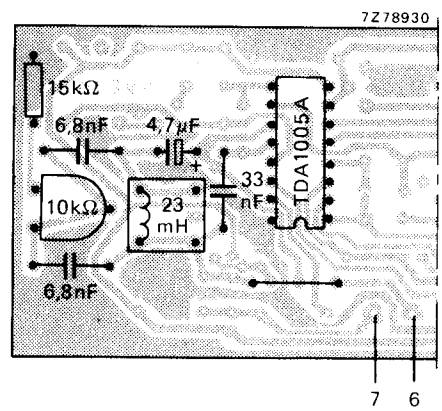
Printed-circuit board component side, showing component layout of Fig. 17.
